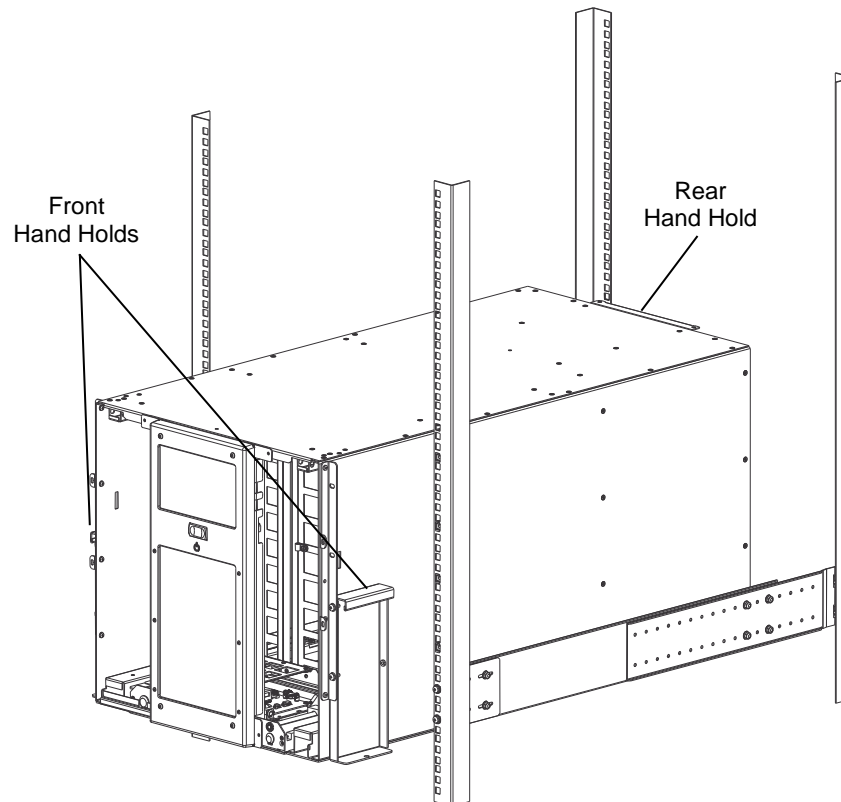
Library ready to be removed from the Rack (RLS-85XX shown)
